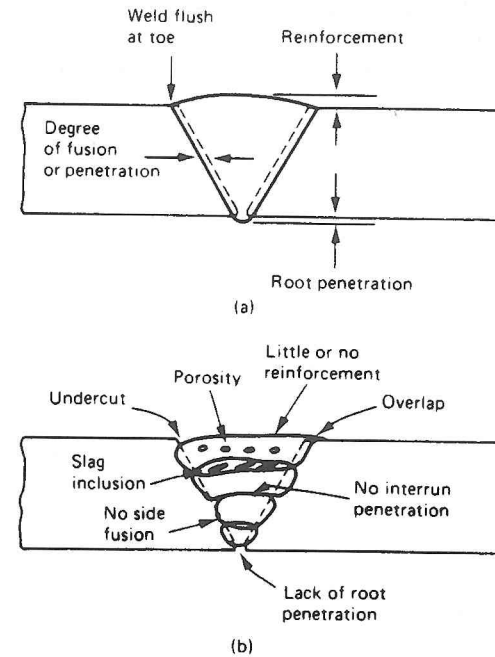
Examples of welds: (a) a good weld; (b) a bad weld
